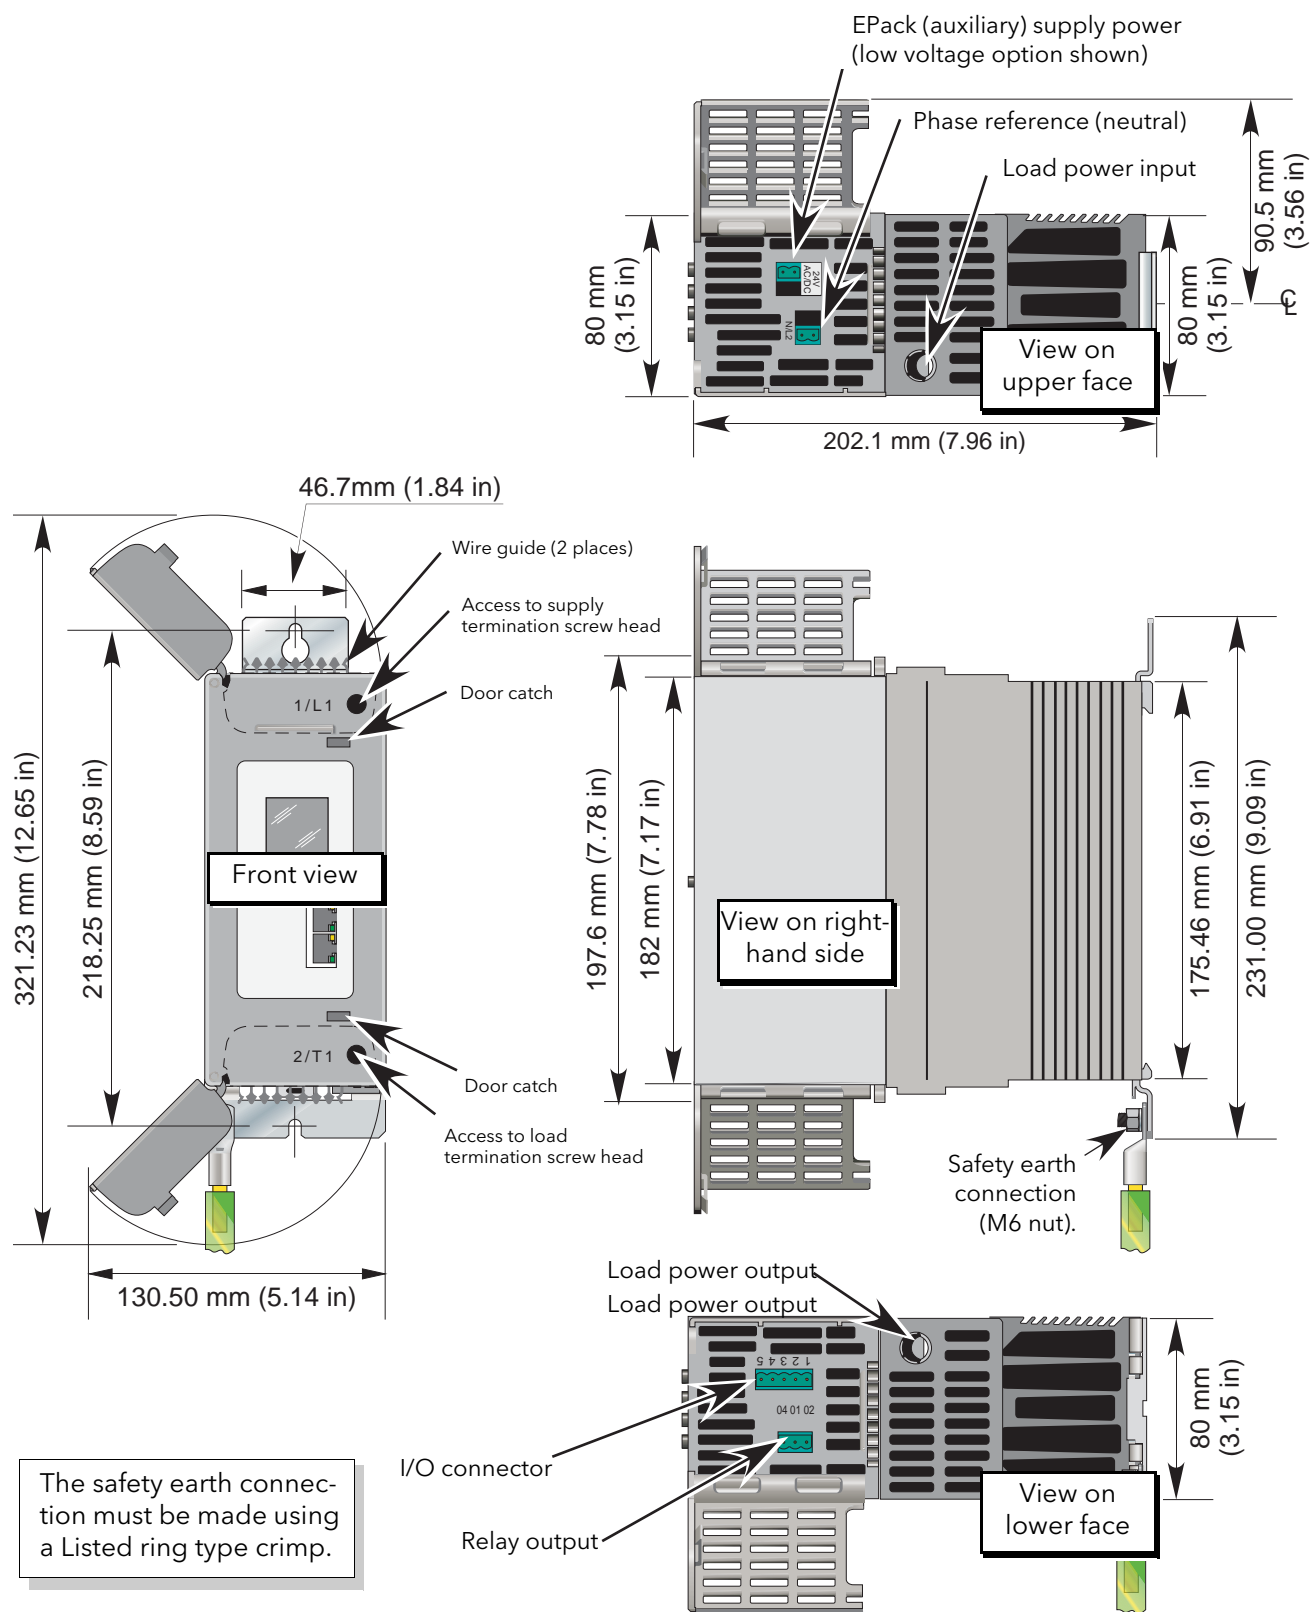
Mechanical installation details (80A to 100A units) (doors open).
